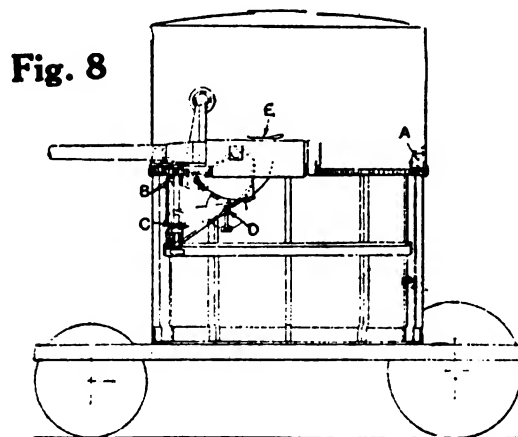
Disposition of gun and turret mechanism in Schneider military car
